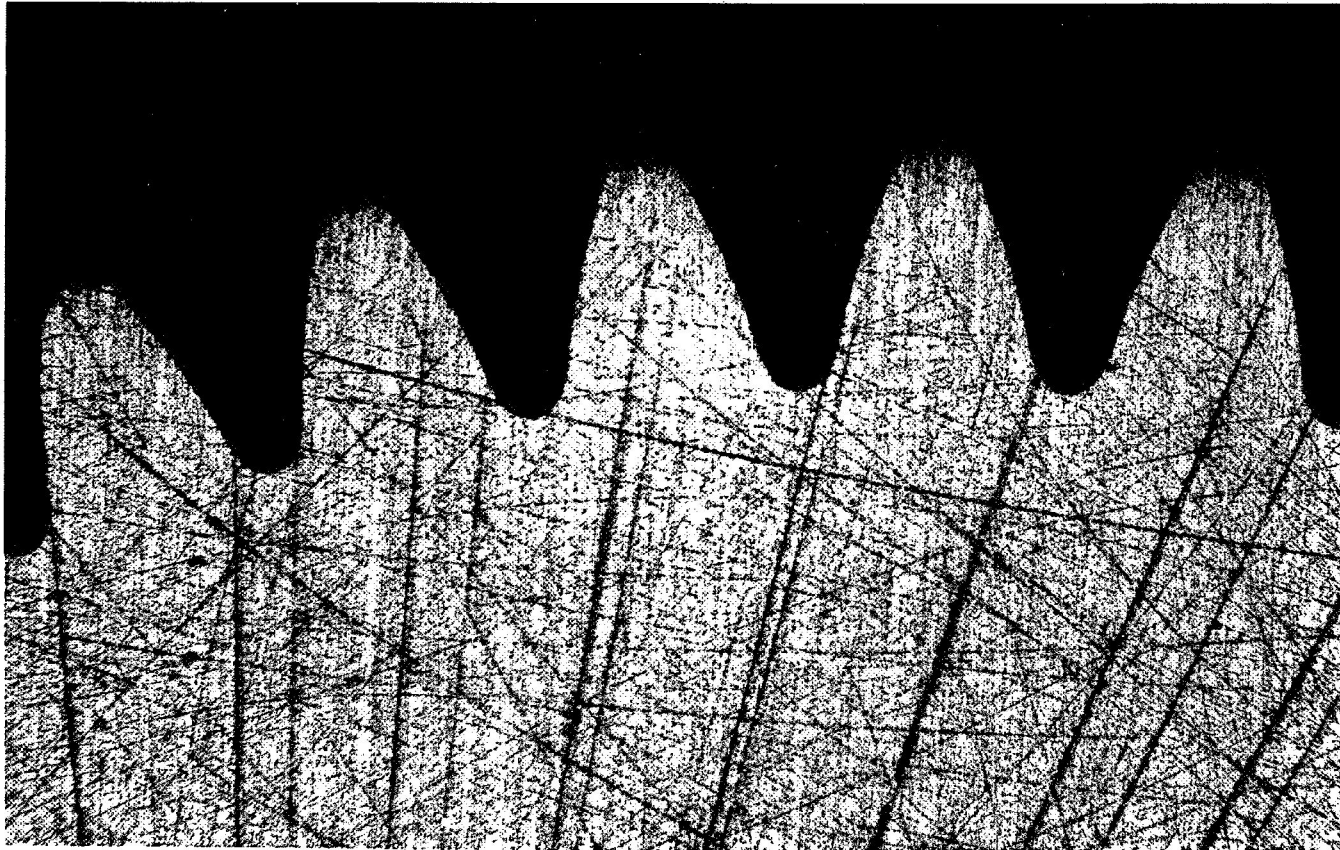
Test 106, 440C Stainless Steel Involute Gear
